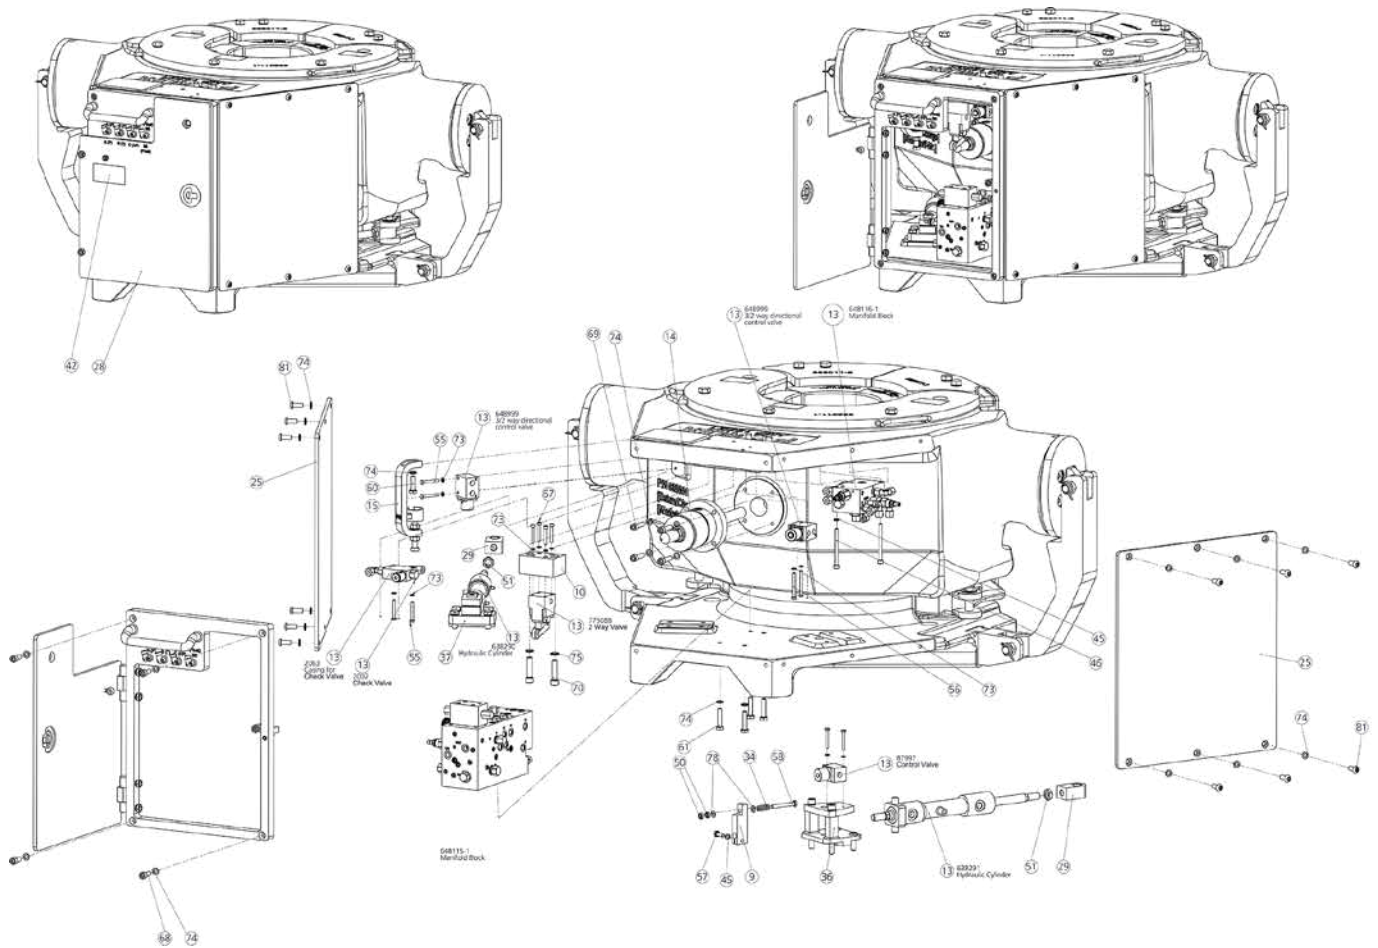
688000-Z AMP<sup>®</sup>-1250/1 Drawing II
